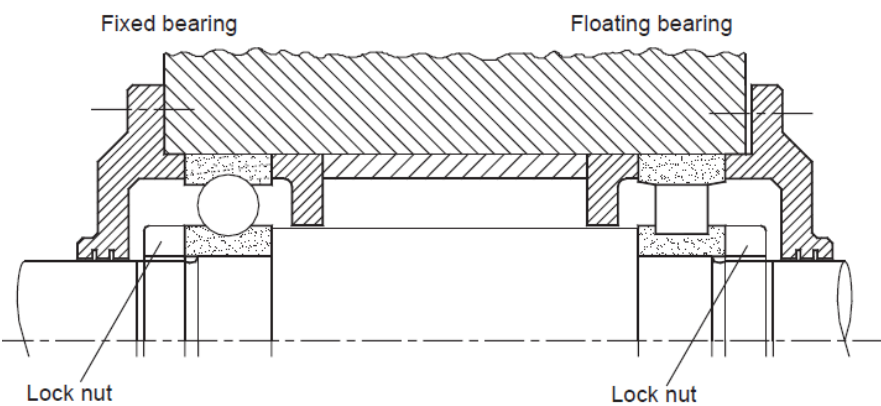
Basic bearing mounting using a deep groove and a cylindrical roller bearing for moderate radial loads at the 'locating deep groove bearing' and high radial load capacity at the cylindrical roller bearing.
